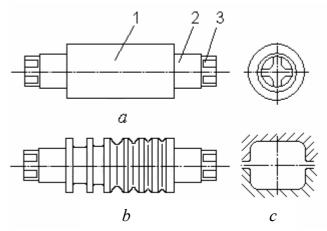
Rollers: flat (a) and grooved (b): 1 - body; 2 - roll neck; 3 - roll wobbler; c - pass
